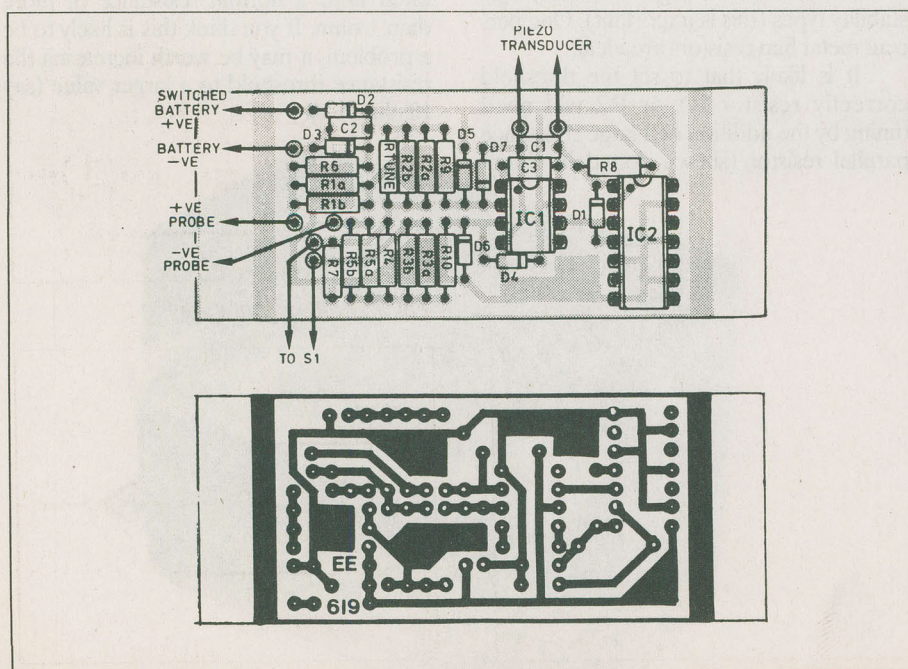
The PCB layout and wiring for the Continuity Tester.
